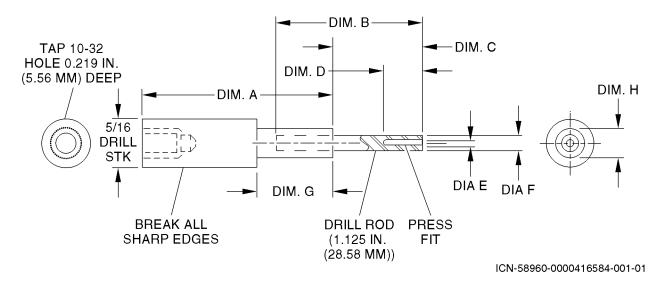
Contact Seating Inspection Kit Contact Adapter, T3009406-13
